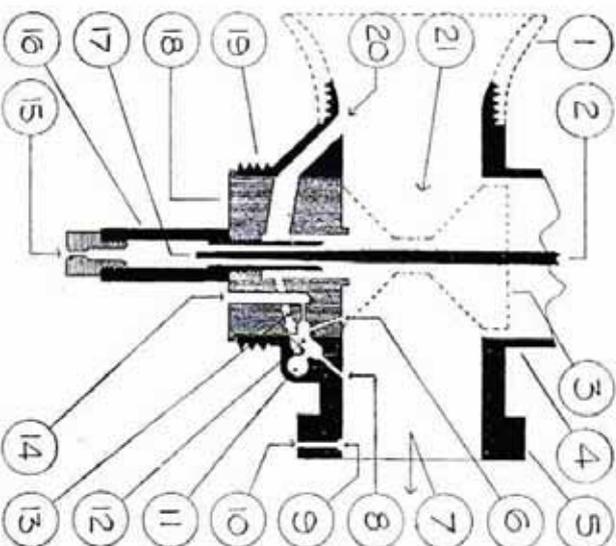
CARBURETTER JET BARREL OR CHOKE.
